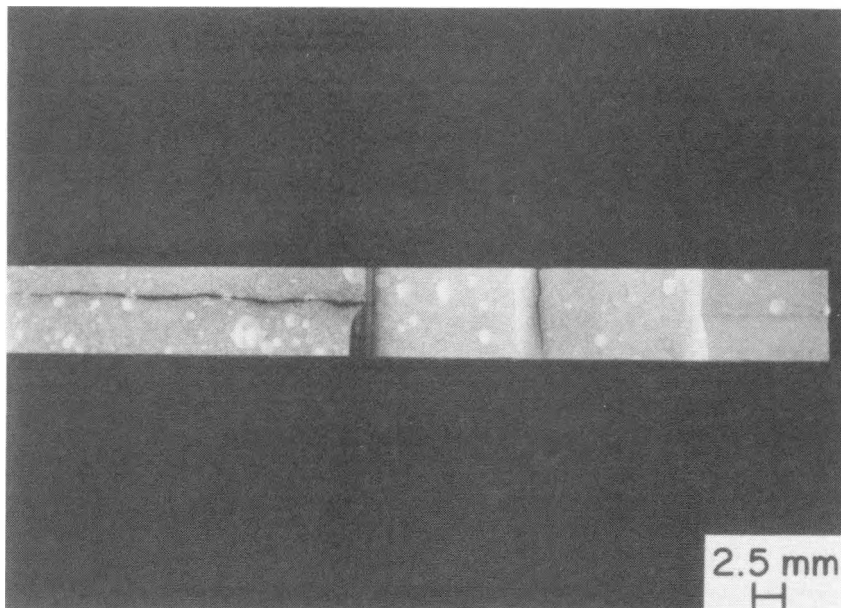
Dye-penetrant Indications for the Seam Weld Crack.
